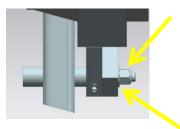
Nut, Washer, and Clamp Ring Pivot Pin
